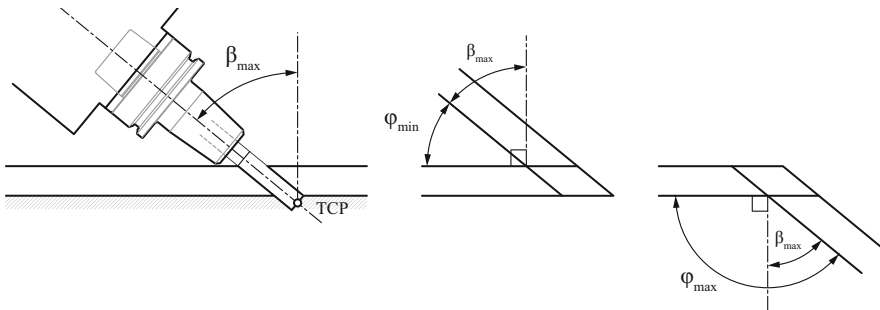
Fabrication Constraints. Side-cutting technique used for the automated fabrication of 1DOF edgewise joints with common 5-axis CNC routers. The maximum tool inclination β_{max} results from the tool and the tool holder geometry. From this we obtain the range of possible fold angles $\pm\varphi$ between panels
